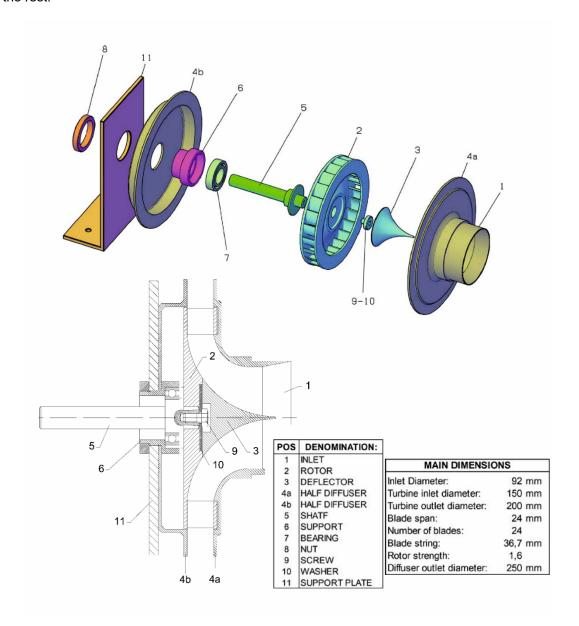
Top: Exploded view of the turbine assembly. Bottom: Side view of the turbine assembled and identifying numbers.
